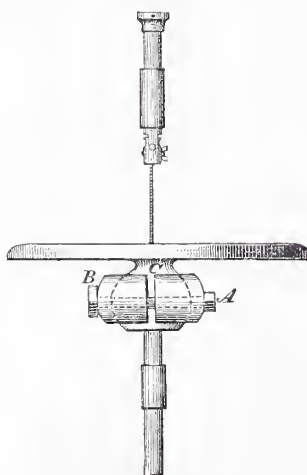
Front View of the Challenge Saw, Showing Hollow Ball and Clamp.
